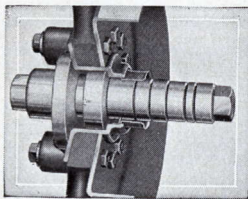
The Illustration Shows the Face Plate and Annular Adapter Method of Mounting Rear Wheels Fitted with Annular Ball Bearings
